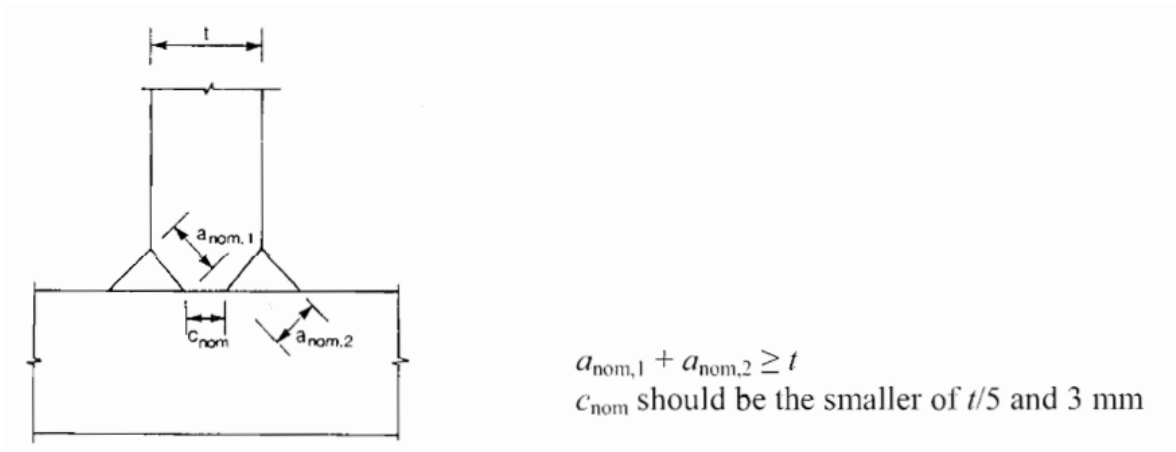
Full penetration of T-butt welds [14, Ch. 4.7.3]
